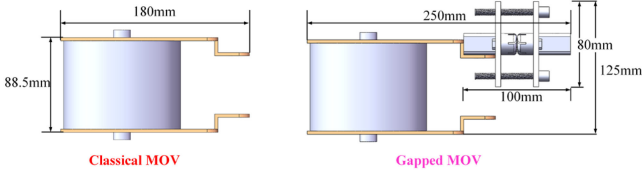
Layout of the classical MOV and the gapped-MOV.
